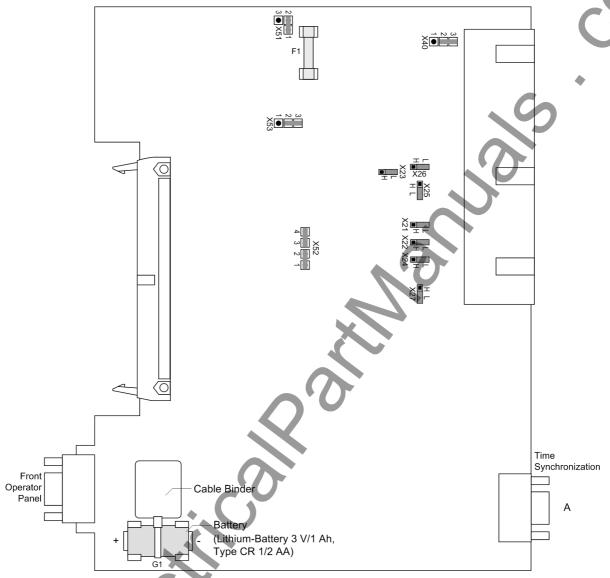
Processor printed circuit board B–CPU for devices .../EE and higher with jumpers settings required for the board configuration
